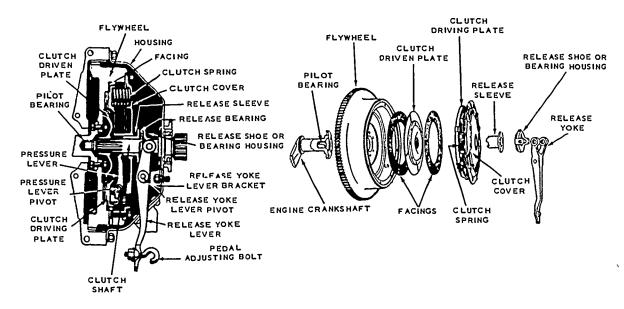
Exploded and cross-section view of a plate clutch.
